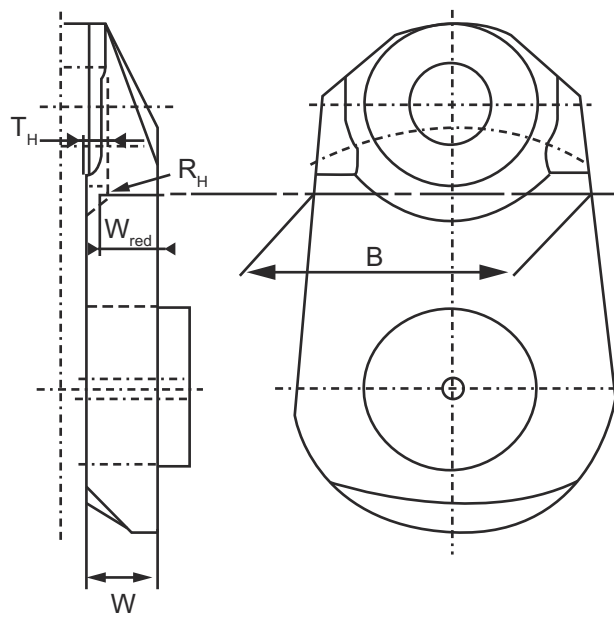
Crank dimensions for overlapped crankshaft
